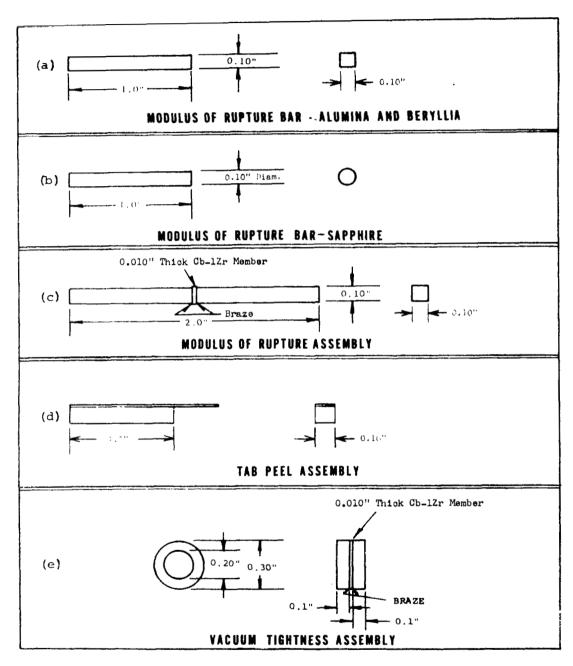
Ceramic-Metal Seal Test Assembly Geometries
